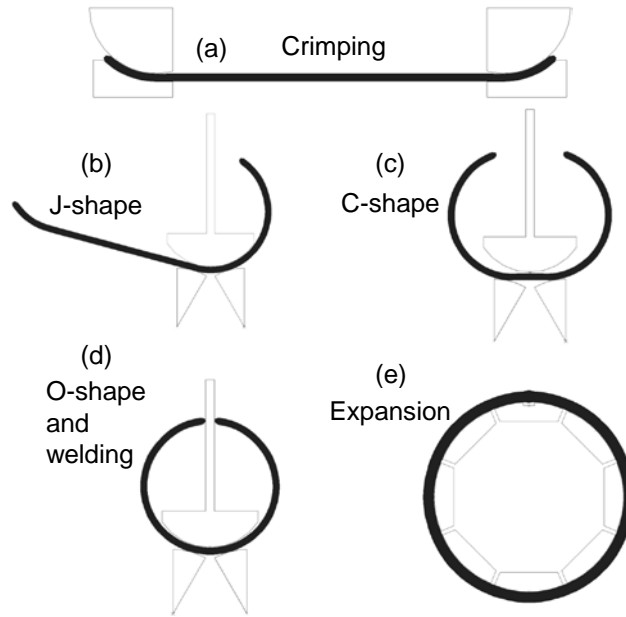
Schematic representation of the subsequent phases of JCO-E manufacturing process: (a) Crimping, (b) J-shape, (c) C-shape, (d) O-shape and welding, (e) Expansion.
